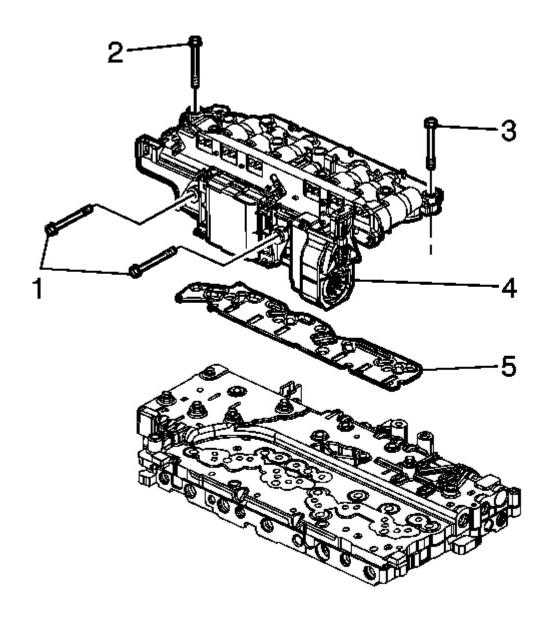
View Of Control Valve Body Assembly Courtesy of GENERAL MOTORS CORP.
